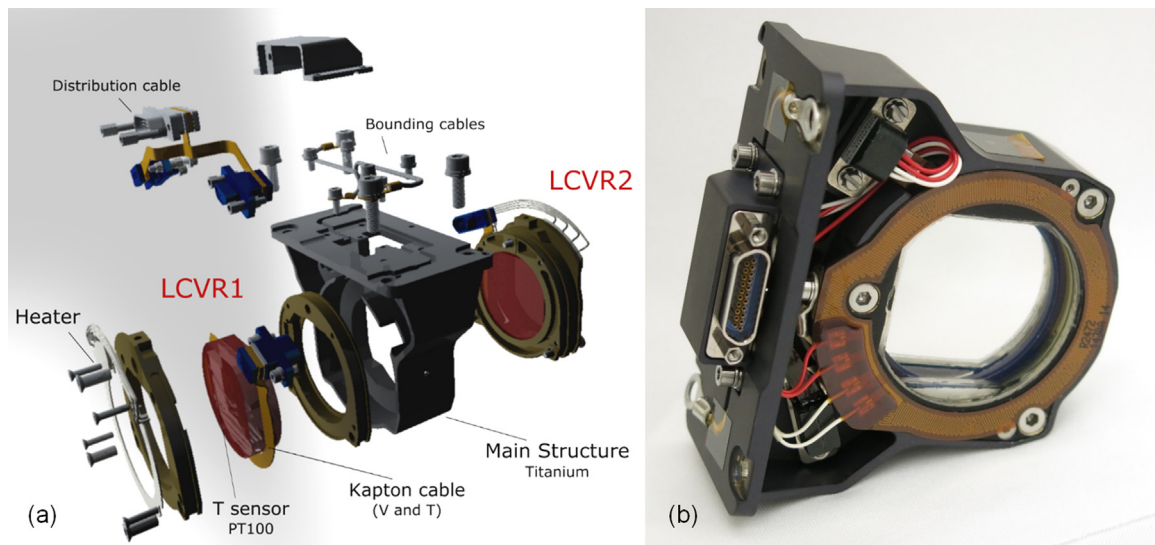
(a) Partially exploded-view drawing of the METIS PMP. The two LCVR assemblies are the main components. (b) Picture of the PMP flight model.
